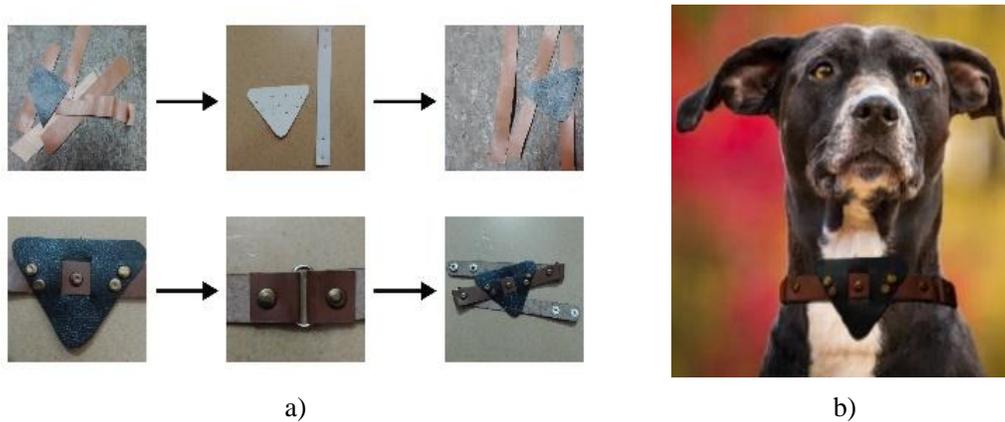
Doggy Belt (a) manufacturing process (b) final view.
